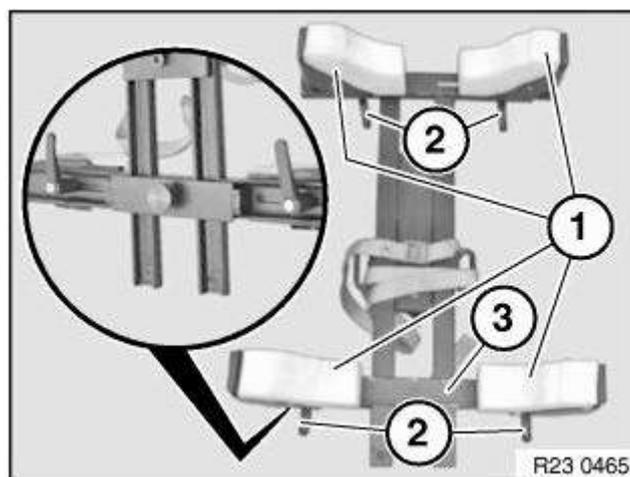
Identifying Transmission Supports, Carrier And Screw
